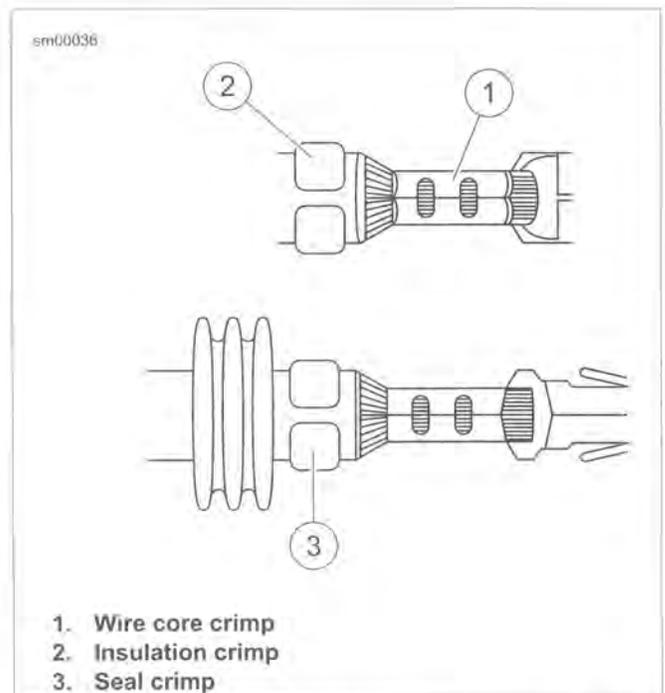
Metri-Pack Connector: Inspect Core and Insulation/Seal Crimps
